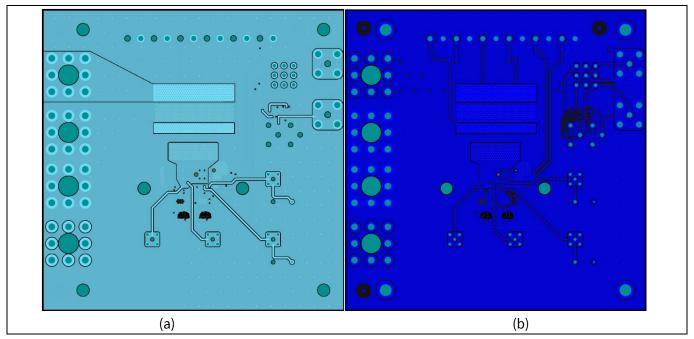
(a) PCB layout mid-layer 2; (b) bottom layer
